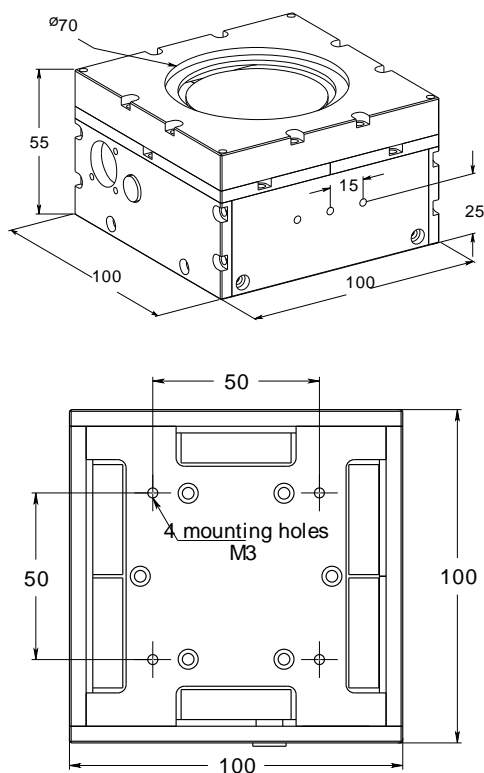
Technical drawing of the mirror case. Three mounting holes on the case bottom and side walls have M3 threading. “High-power” version of the case with a fan and a 2.5mm socket for the fan external 5V power supply is shown.
